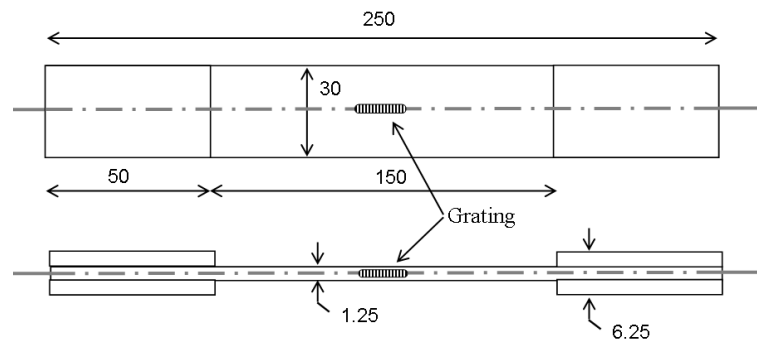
Dimensions of the used tensile coupon, equipped with tabs.
